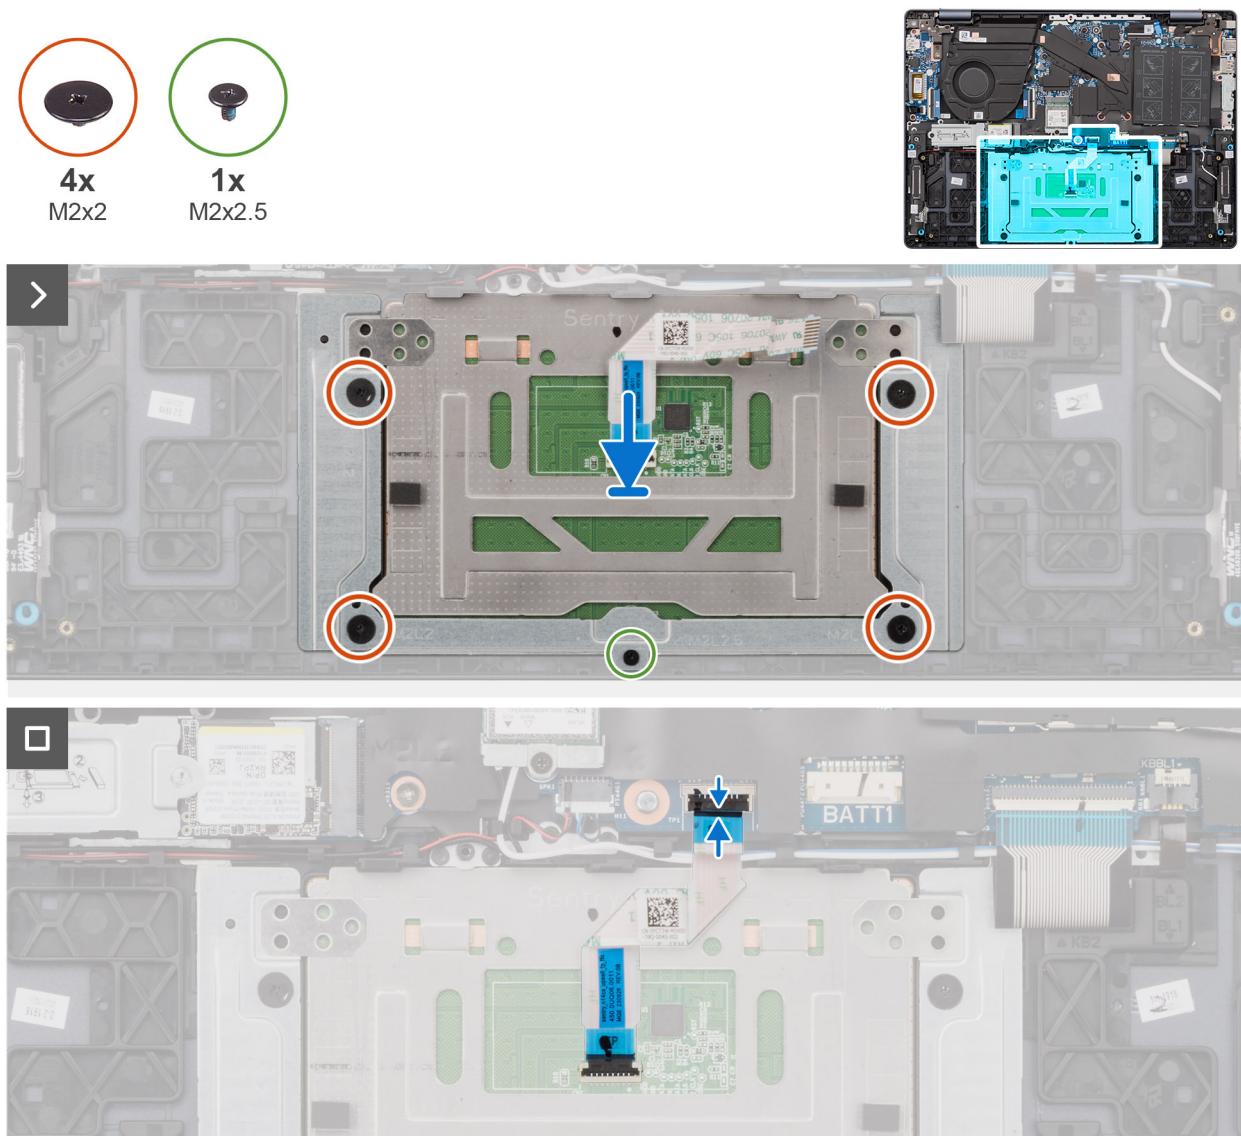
Installing the touchpad (for computers shipped with an aluminum chassis)
